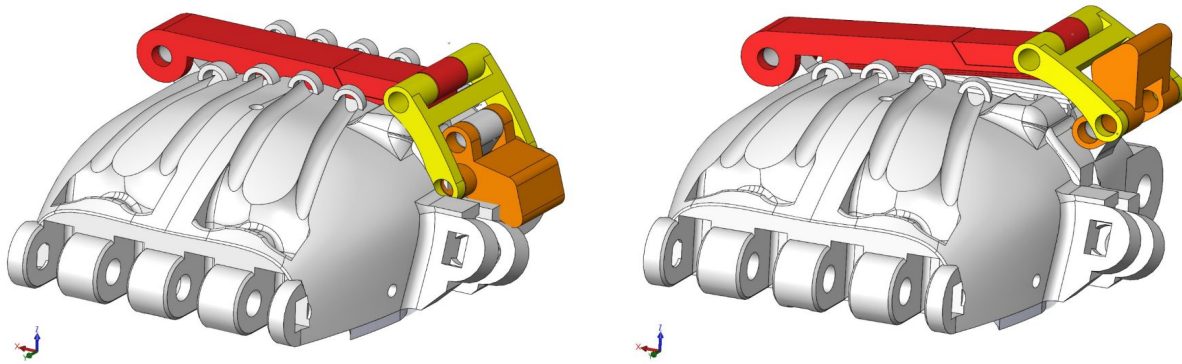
SolidWorks model of right handed final prototype. The clamp is pictured in color, in both the closed (left) and open (right) positions. To open or close the clamp, the user operates the lever (orange).
